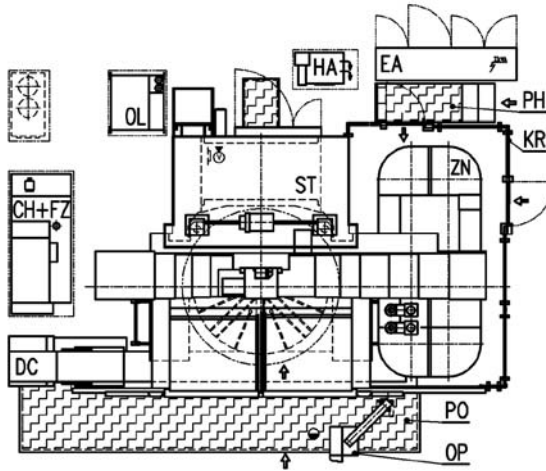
Plan of the machine with the integrated tool holder manipulator
